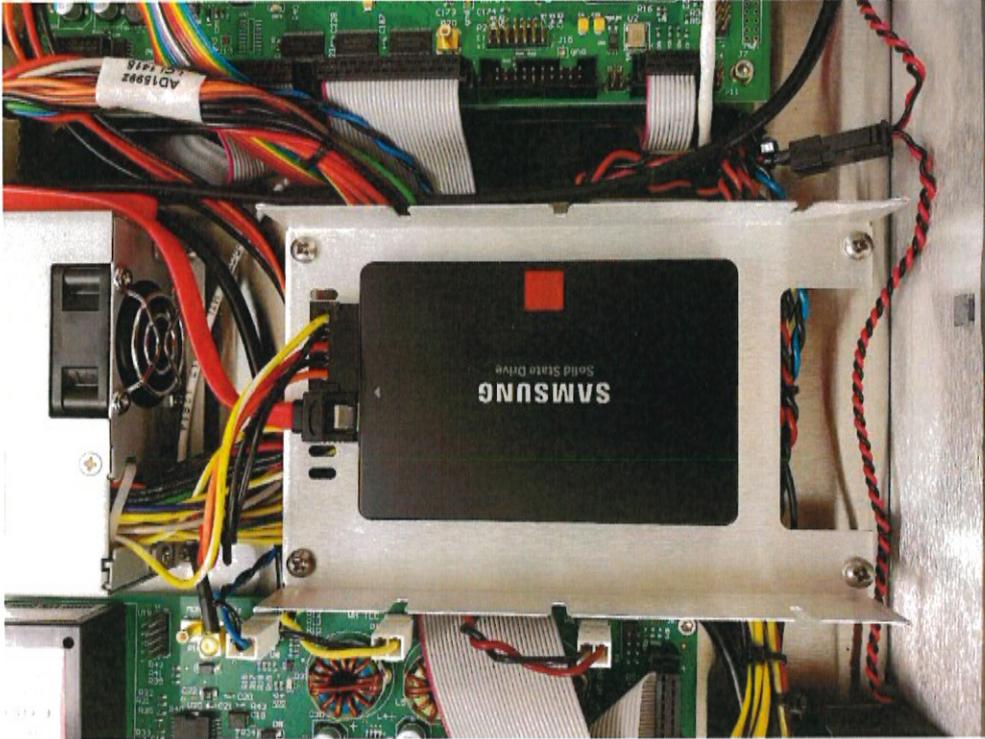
SSD mounted on the bracket. Showing SSD mounting orientation. Secured in the chassis with the four screws. And power and SATA cables connected to the SSD.
